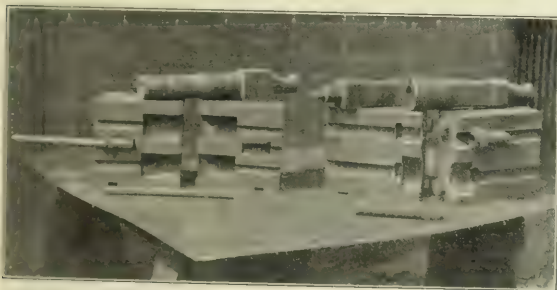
Insulator Pin and Cylinder Cock Top Piece Dies.
